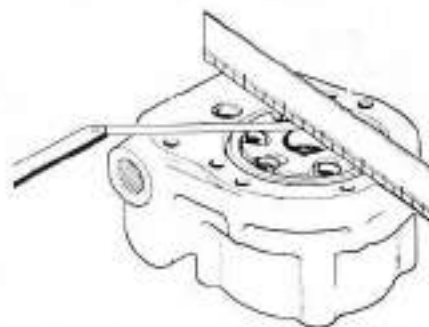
Use method shown to check and clearance of carrier and rollers. Refer to text.
